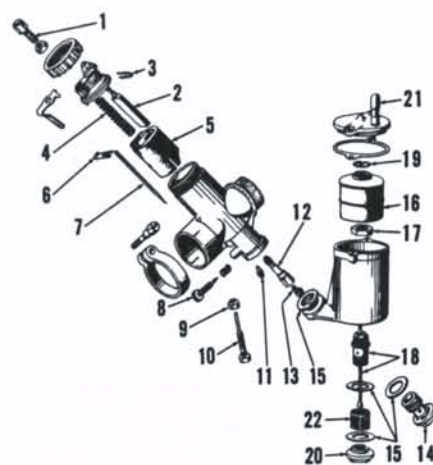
Exploded view of Del'Orto carburetor. Float bowl must be vertical when installed.
